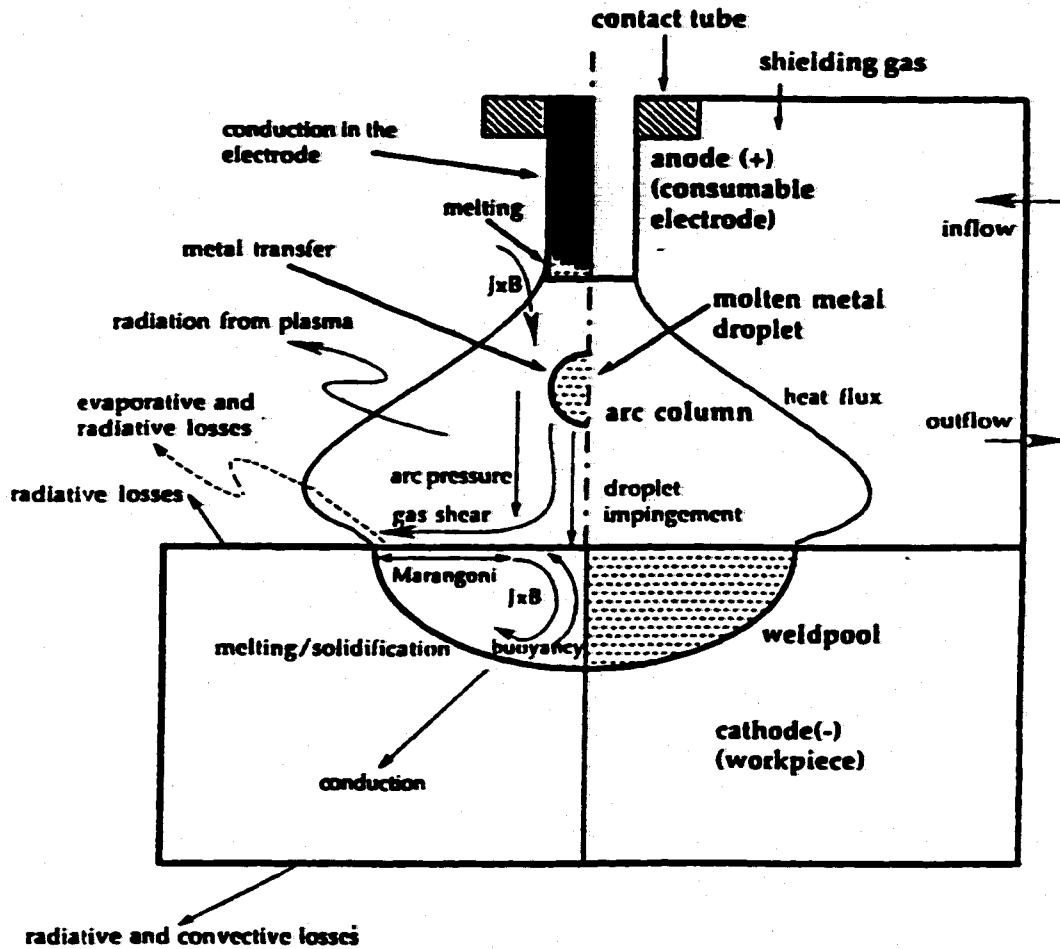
Schematic representation of a GMA welding arc including the consumable electrode and the weld pool.⁵⁰
